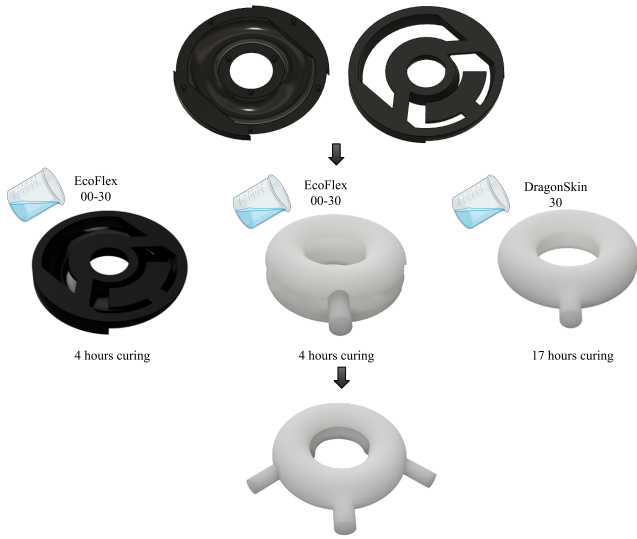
Ring manufacturing process including mold design, casting and tube insertion
